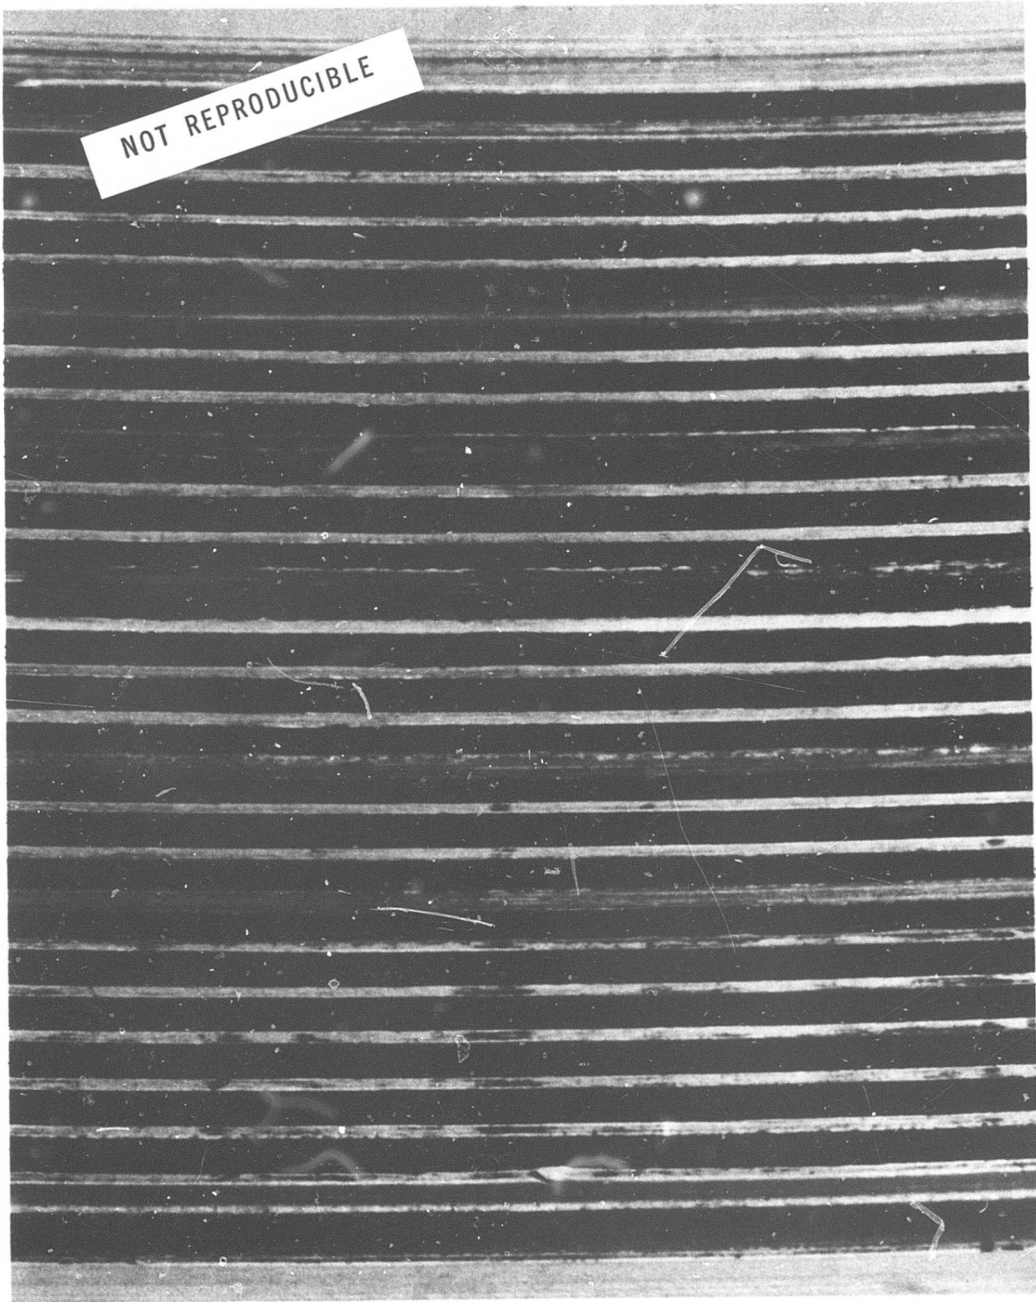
Labyrinth Seal Stationary Component After Aligned Testing.
